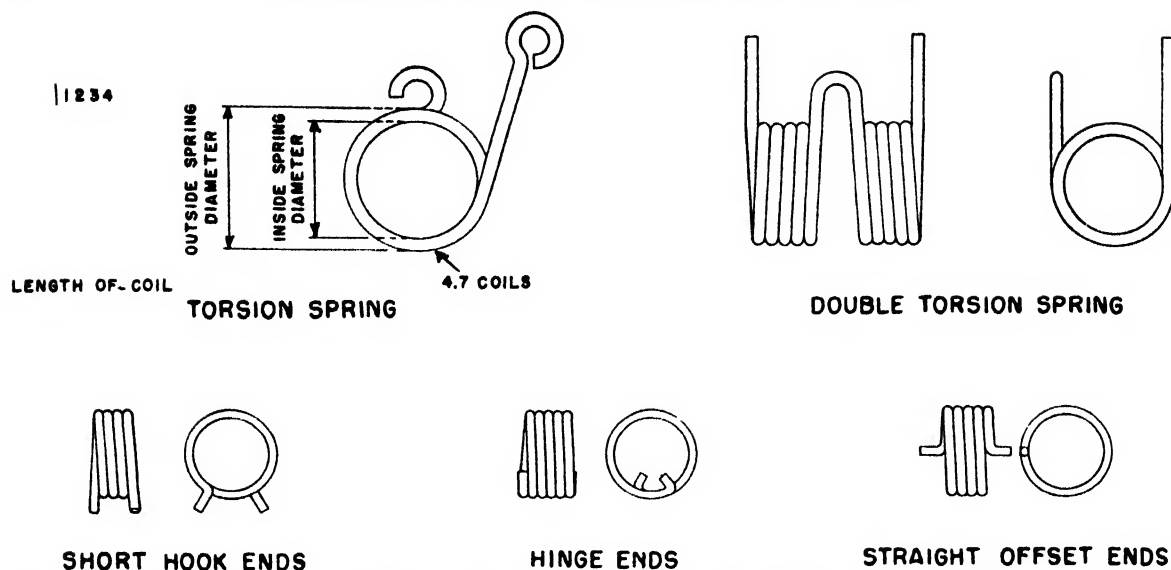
39. (Above) Illustrative sketches of (left) a torsion spring and (right) a double torsion spring. (Below) Types of ends for torsion springs.
